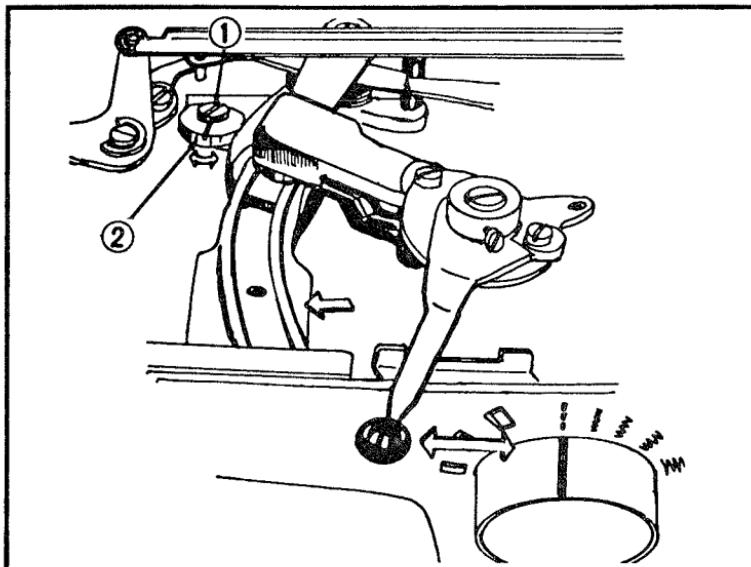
To adjust the various needle positions on side load and front load machines with oscillating shuttles, read the text carefully. This mechanism is under the top cover.
